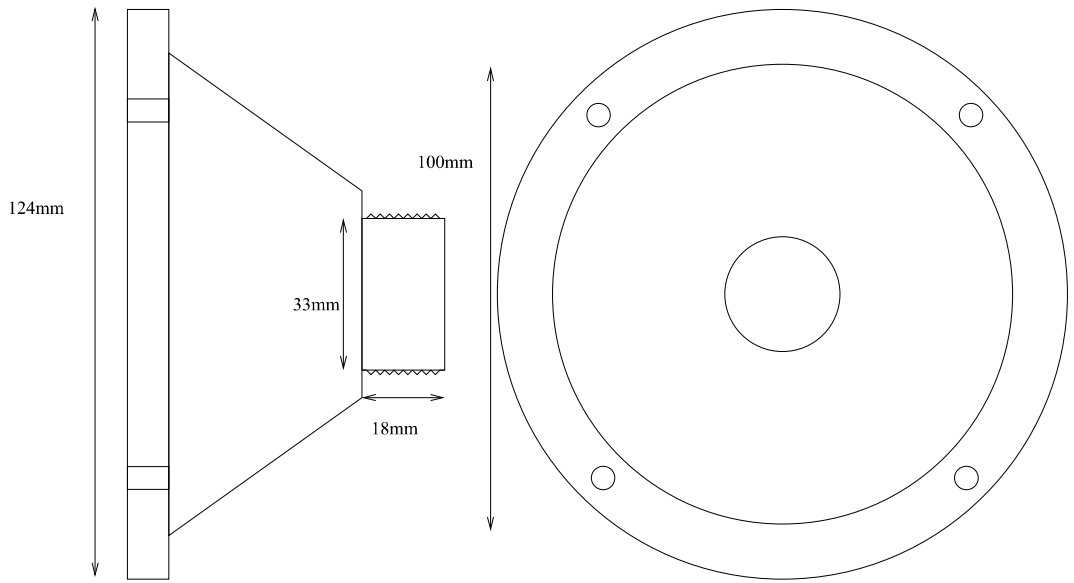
Loudspeaker adapter for mounting a cone speaker on the horn thread mount piece.
